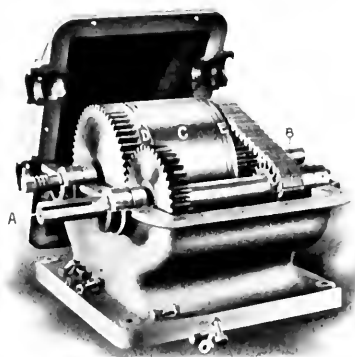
Electric Reversing Clutch, with Cover Removed.
